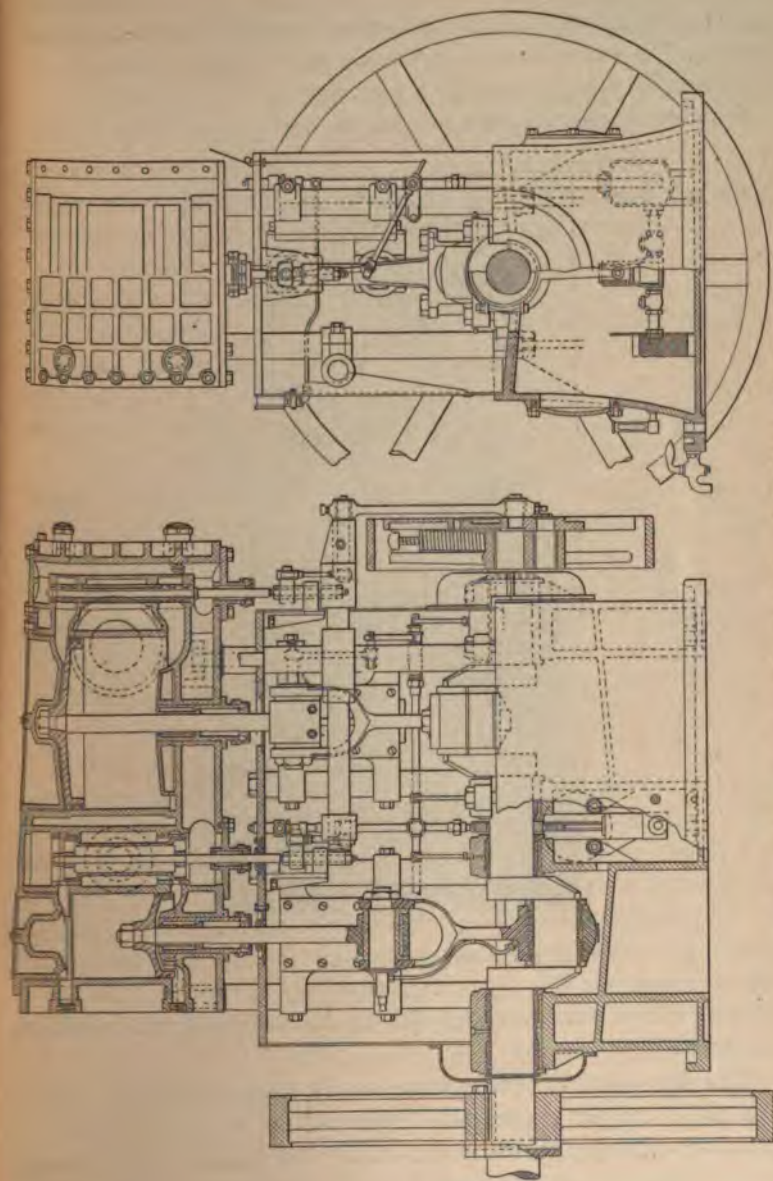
Cross-section W. D. Forbes & Company Engine, 100 k. w.
